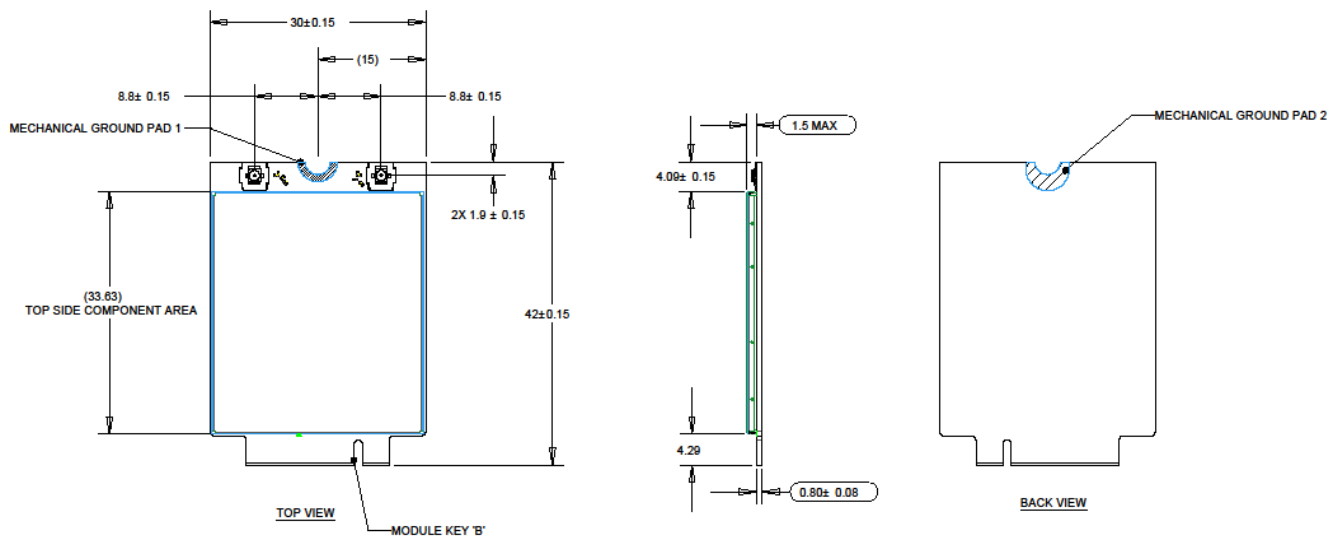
Module mechanical drawing based on PCIe M.2 Type 3042 specification
